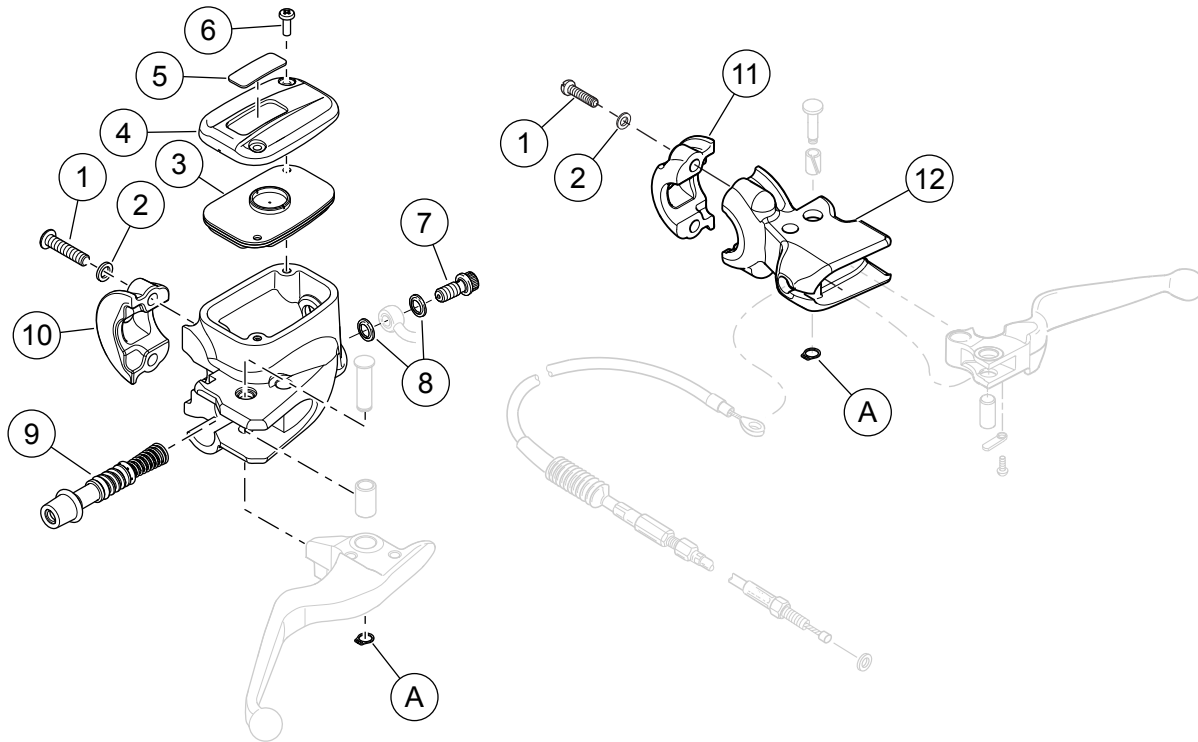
Service Parts: Chrome Clutch and Brake Master Cylinder/Reservoir Kit
